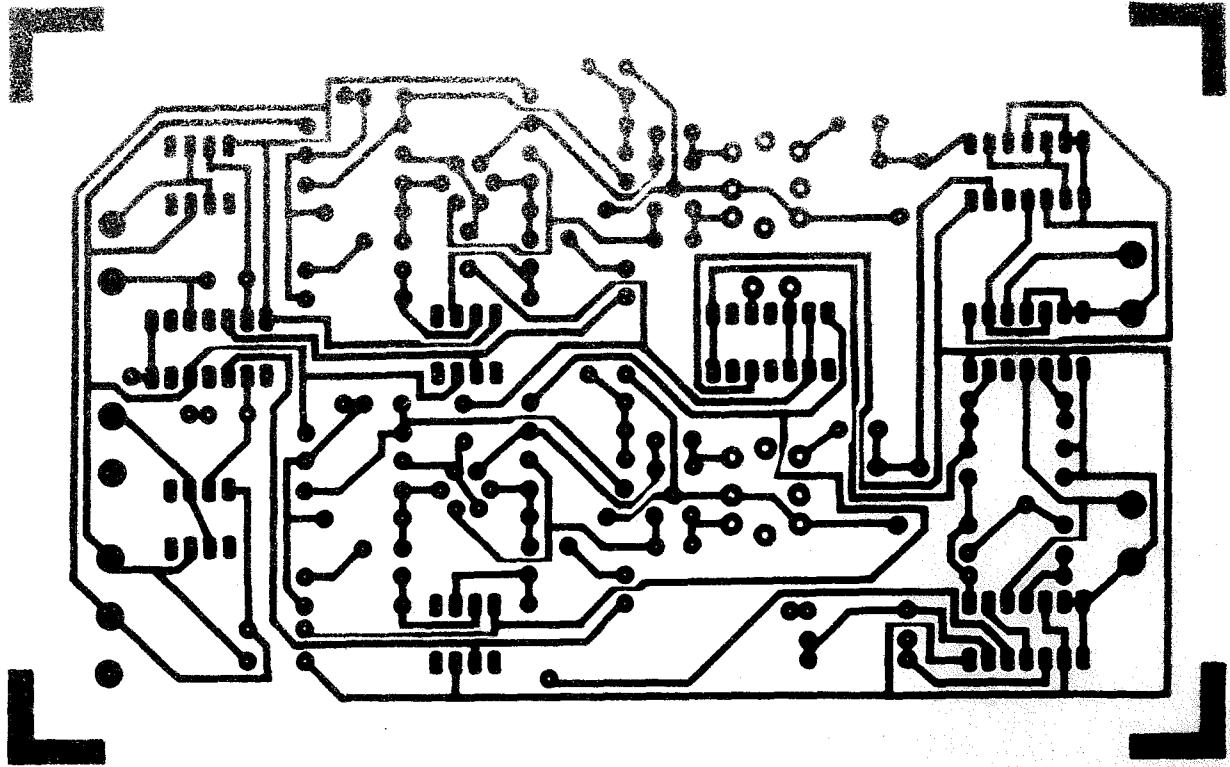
PCB MASK FOR THE DUAL CHANNEL DISCRETE COMPONENT CIRCUIT
